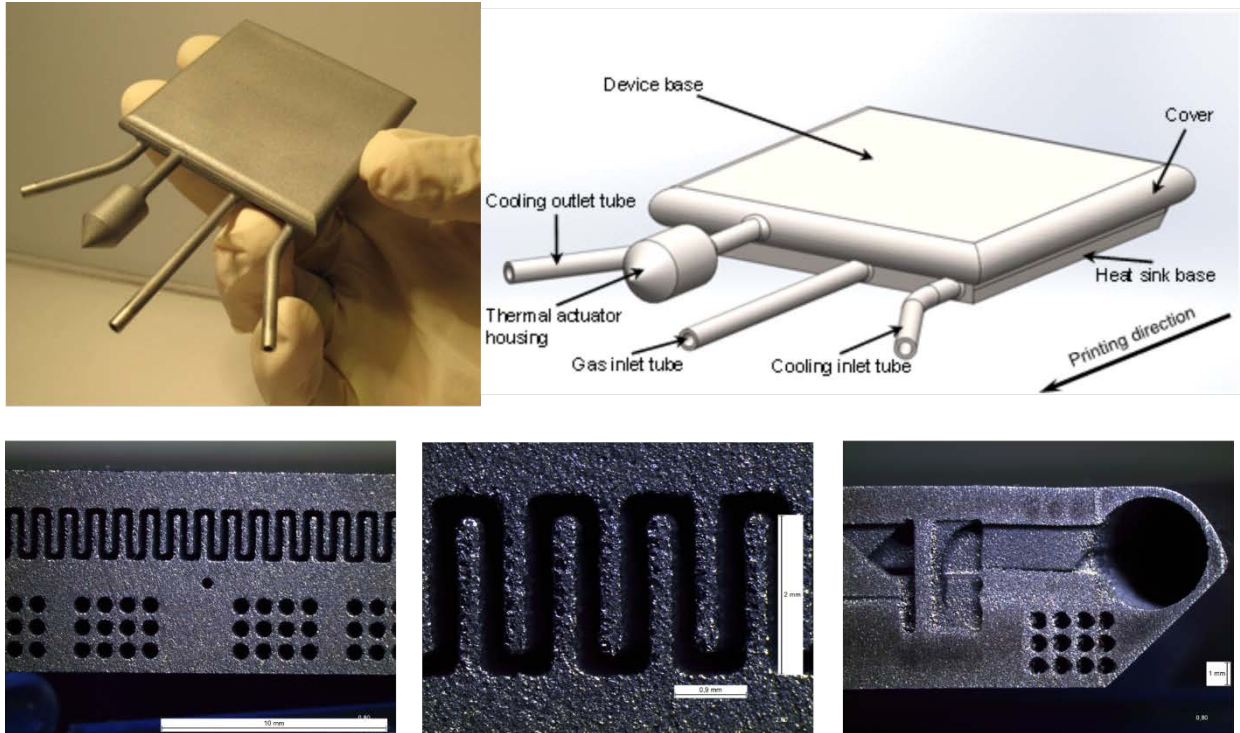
Pictures of the manufactured heat switch. The bottom pictures are taken with an optical microscope after the switch is cut with wire electrical discharge machining.
